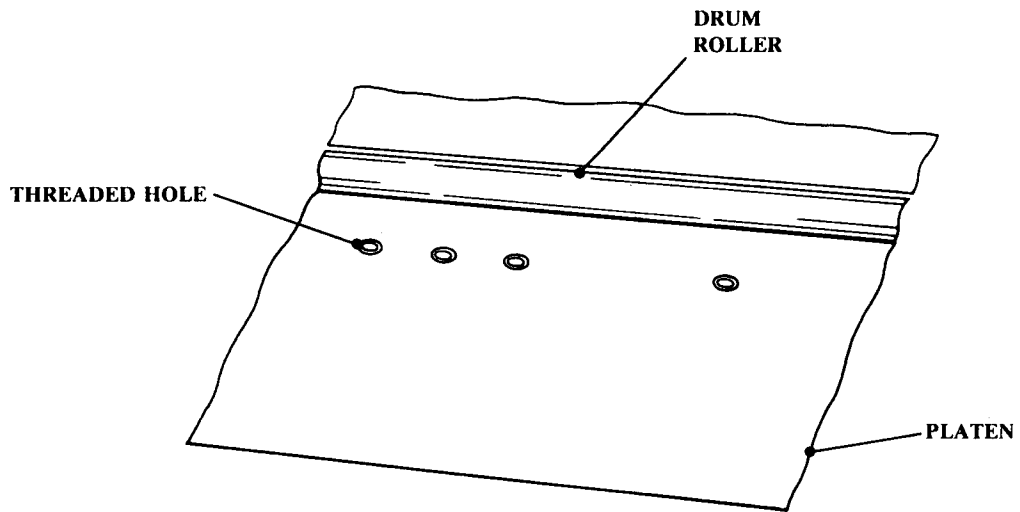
LEFT PINCH ROLLER ASSEMBLY THUMBSCREW
